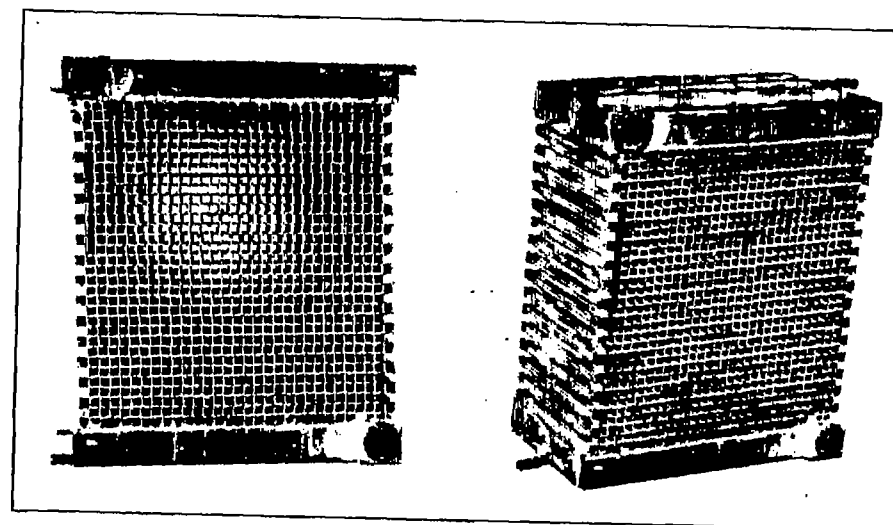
The Livingston Radiator & Manufacturing Co. $\frac{1}{4}$ -inch square tube. Core 4 inches deep.
